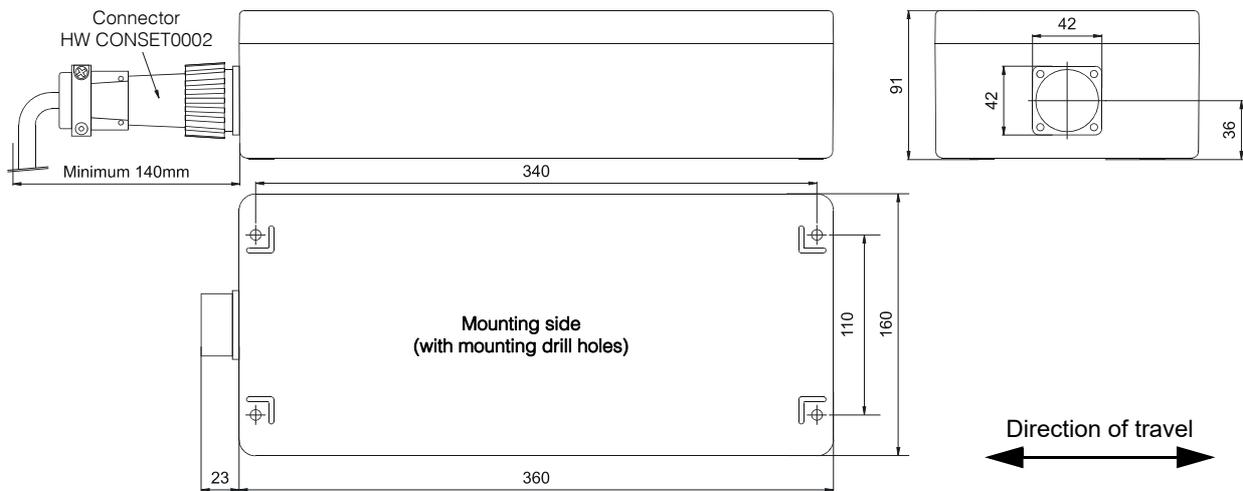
Outline antenna HG 98780ZA/WA (with casing dimensions)
